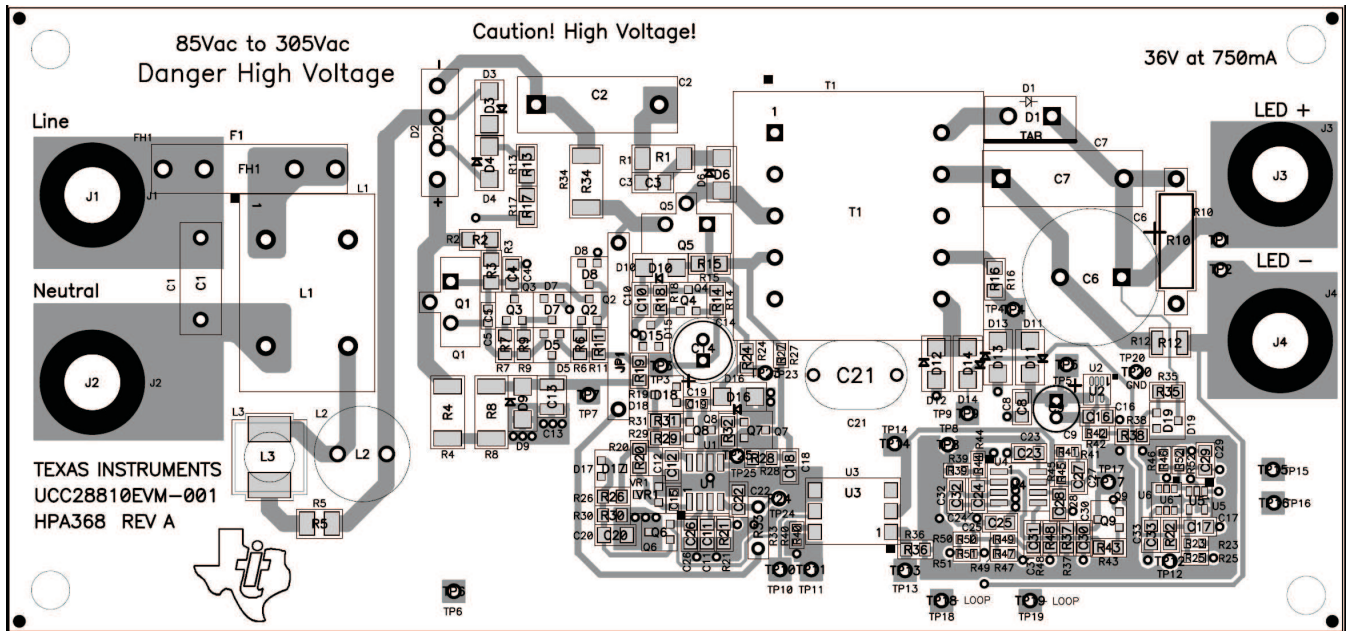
UCC28810EVM-001 Top Layer Assembly Drawing (top view)
